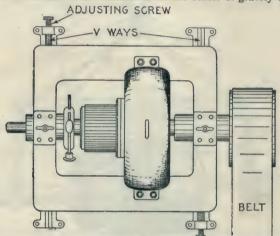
Plan of belt drive machine showing V ways and adjusting screws for moving the machine forward from the engine or counter shaft to take up slack in the belt.
